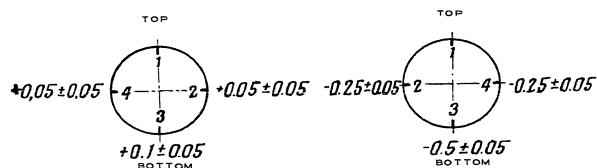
CHECKING AND ADJUSTING ALIGNMENT OF ENGINES RELATIVE TO MAIN GEARBOX
